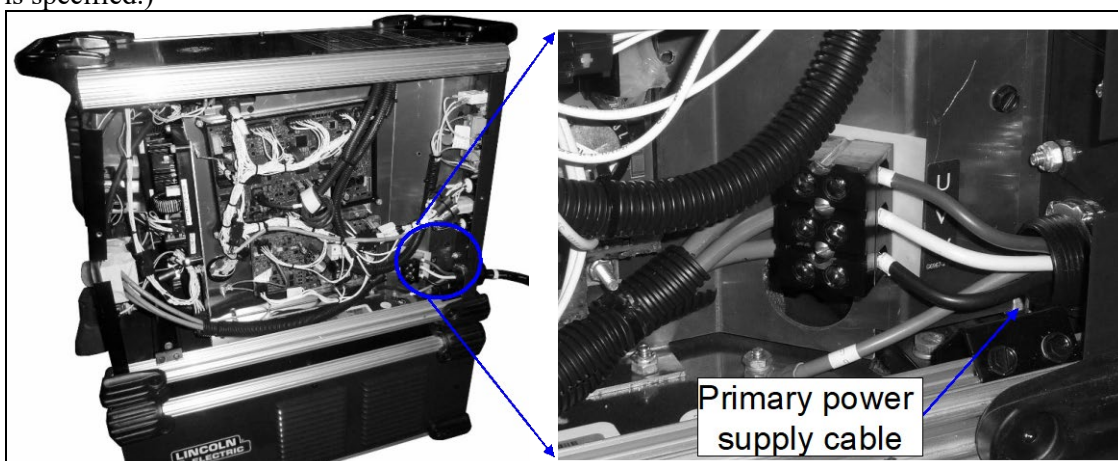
(f) Primary power supply cable of welding power supply Power Wave R350 and Power Wave S350
